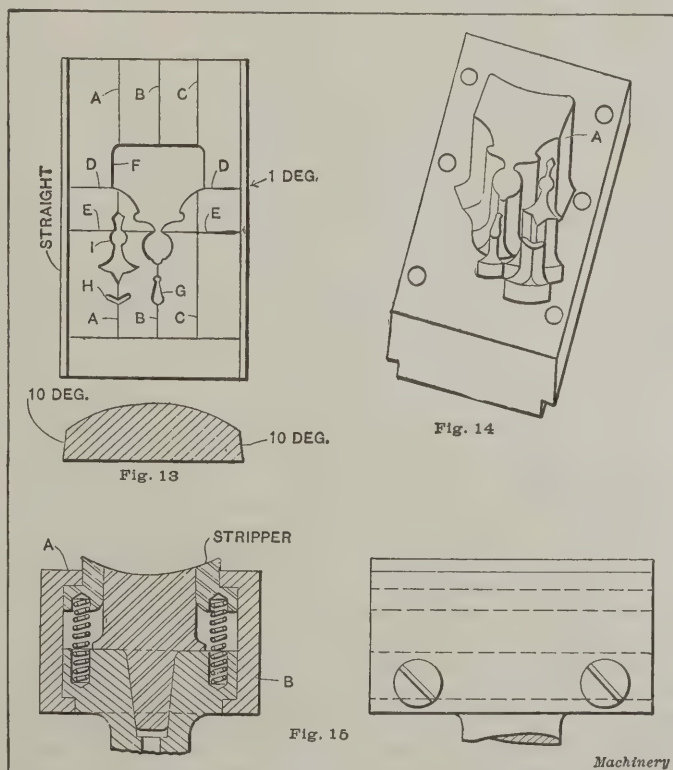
Laying out a Perforating Die. Fig. 14. Perspective View of Perforating Punch. Fig. 15. Punch Holder and Stripper, showing Punch, Fig. 14, in Section
